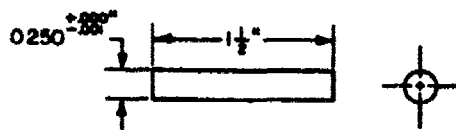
Shear specimen for Inconel 718 and Inconel 625 bars. Drawing 3S.
